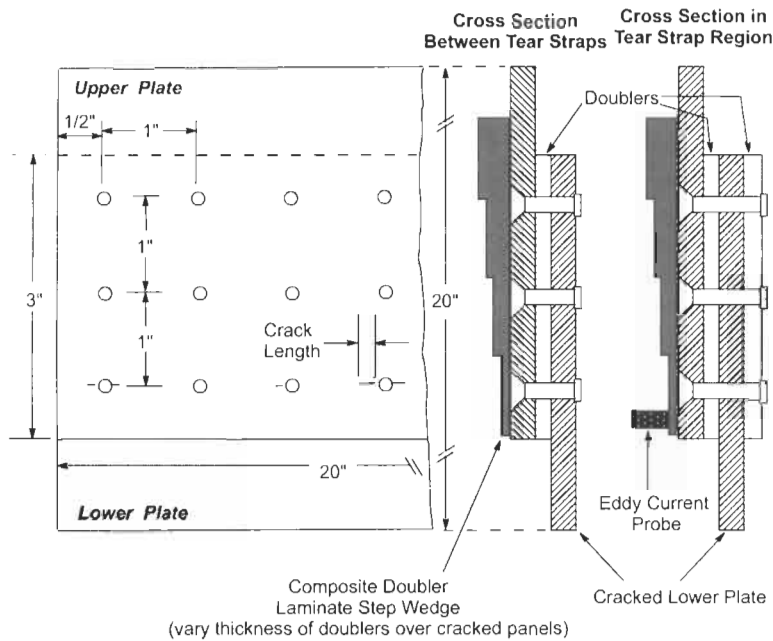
Test set-up for detection of subsurface cracks through composite doublers.
